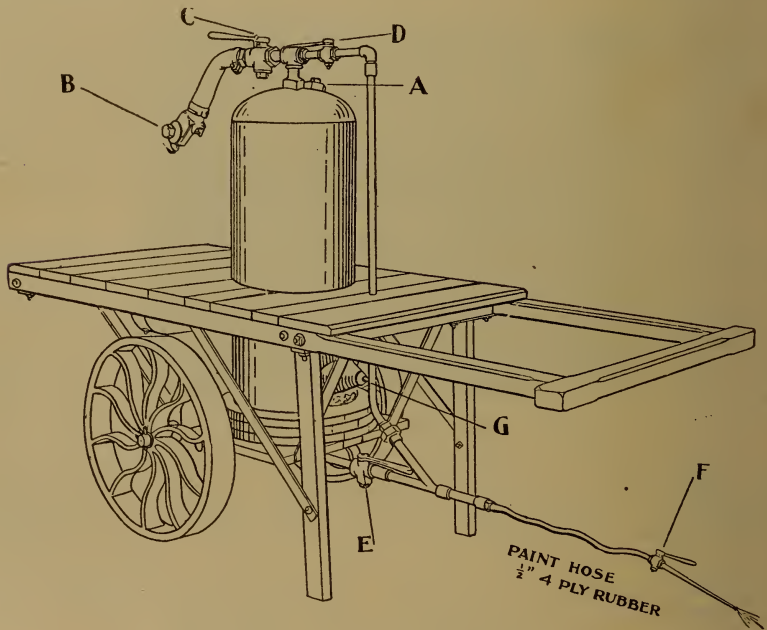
COMPRESSED AIR PAINTING MACHINE.
